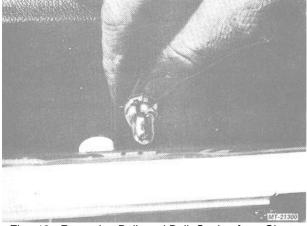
Removing Bulb and Bulb Socket from Cluster
